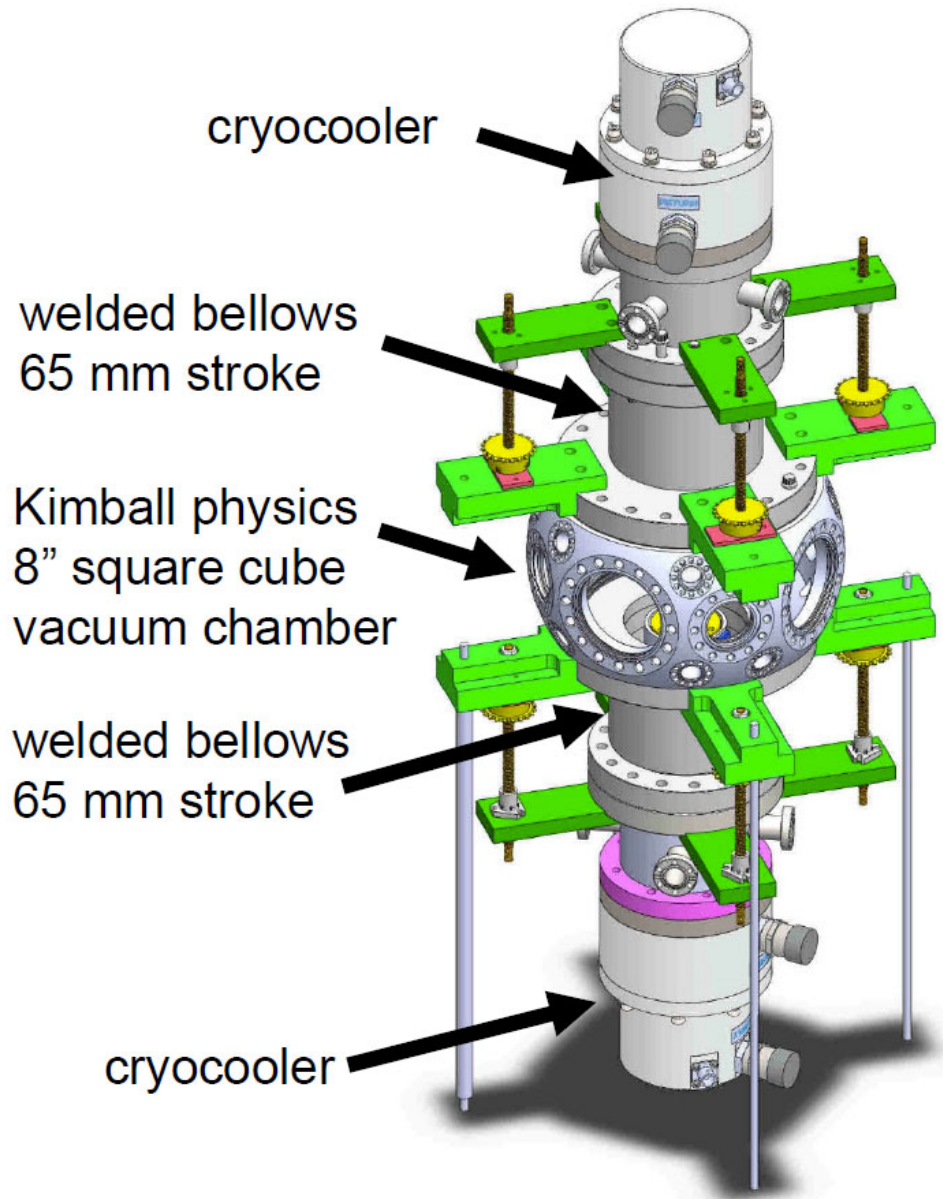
Solidworks drawing showing cryocoolers and welded bellows.
